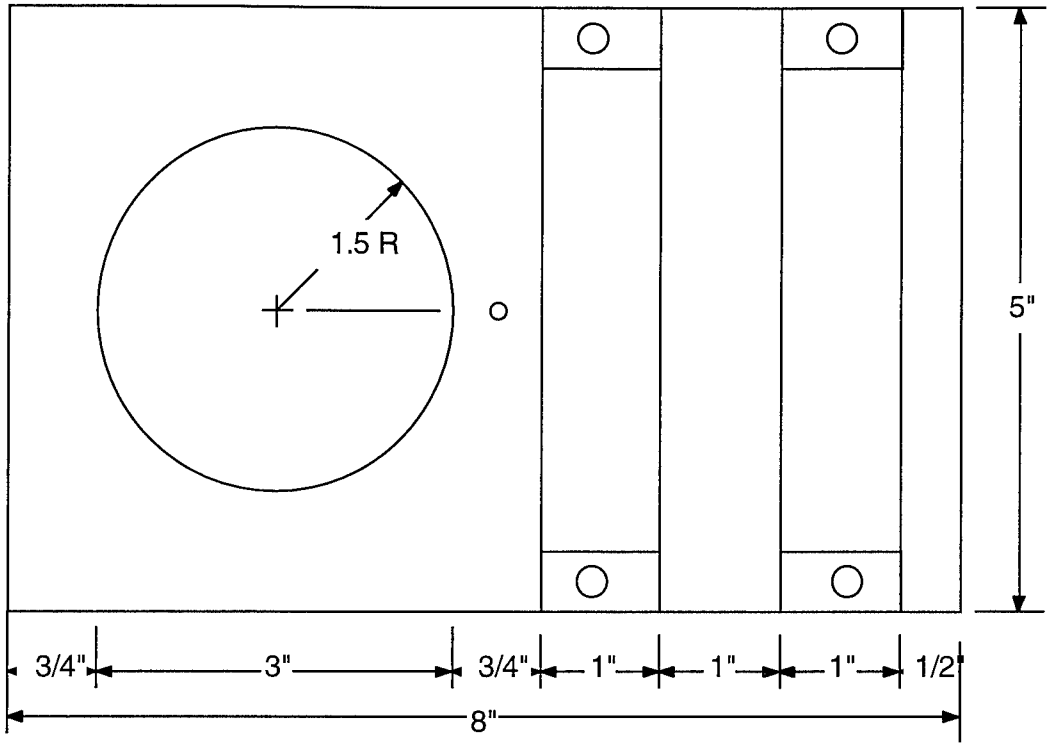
AFIT Shock Tunnel Test Section Floor (dimensions in inches)
